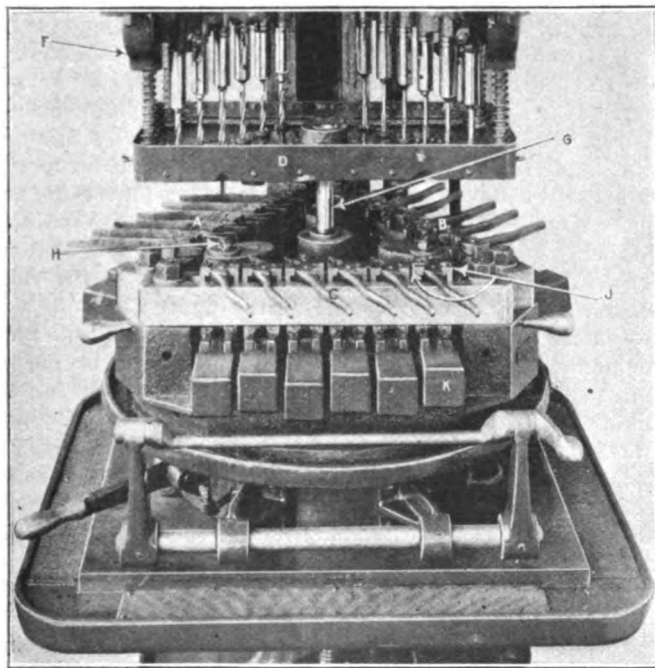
THE DRILLING MACHINE WITH FIXTURE AND WORK IN PLACE
